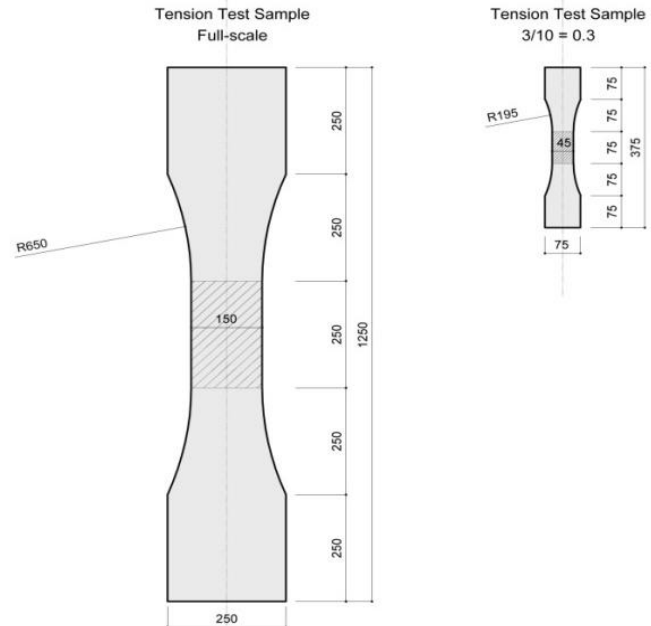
(Left): Tension test specimen according to the EN789 norm. (Right): Reduced dimensions due to testing equipment limitations (30% of original size).
